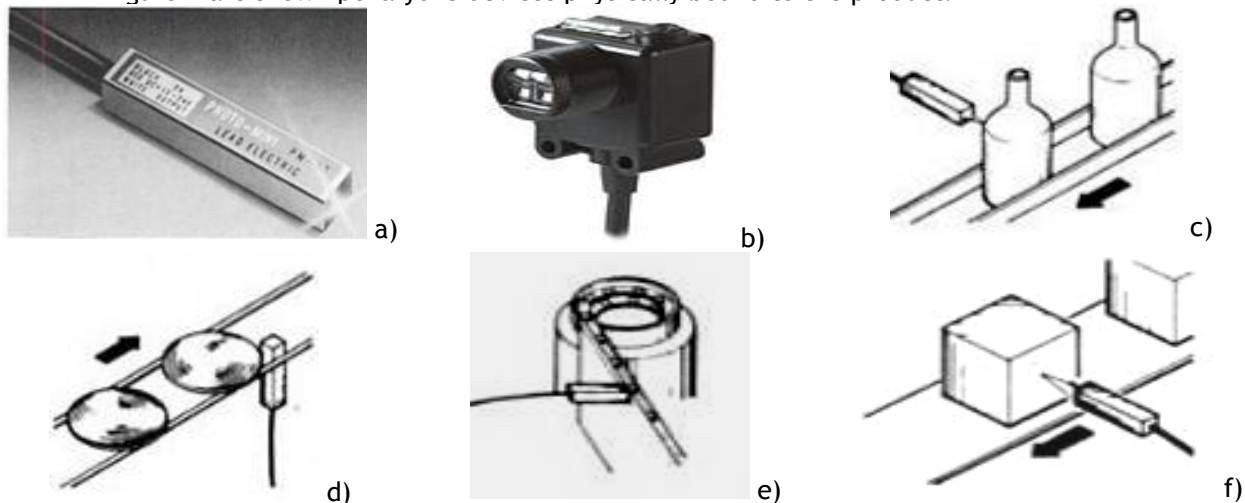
Utilization of physical contact sensors a and b-models of electric switches; c) sensor for inspecting transparent objects; d) sensor for verifying the plate feeding (food industry); e) sensor for checking the parts on technological flow; f) sensor for verifying similar objects
